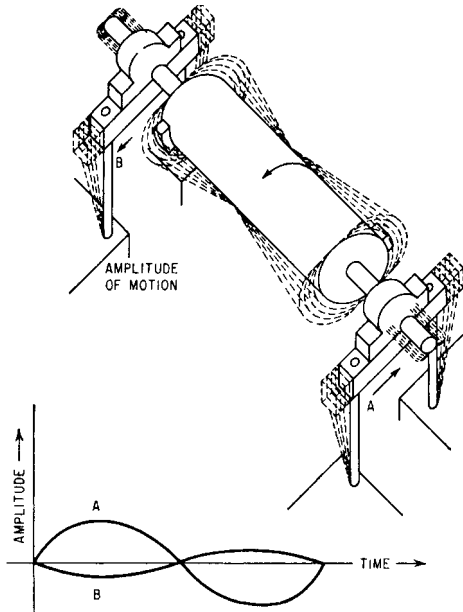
Motion of unbalanced rotor and bearings in flexible-bearing, centrifugal balancing machine.
